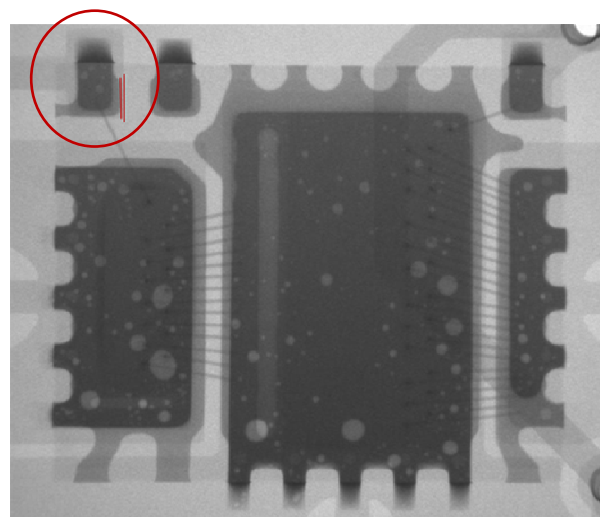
Skewed Mounting (dut #12). Gate1 has .045mm spacing from pad edge (in red).
